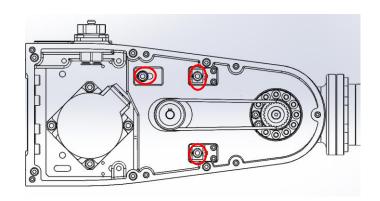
Screw Positions on Motor Mounting Plate of Axis 4 Timing belt
